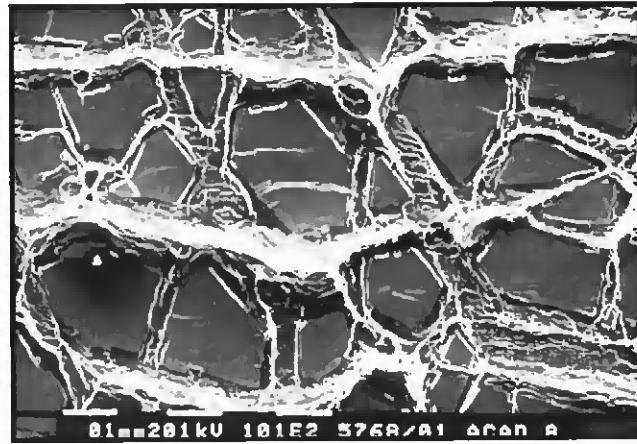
Weld interface surface after fracture, cold roll welding Al-Al with one-sided electroless Ni plating (ACAD),  $Y = 0.595$ .
